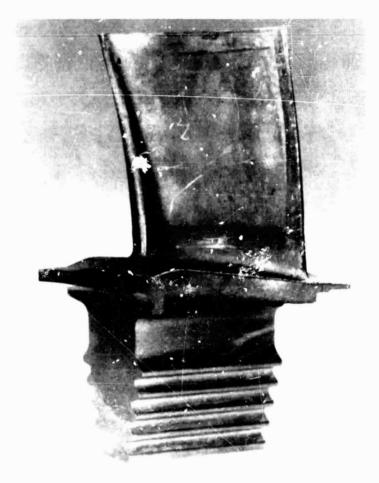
High-Pressure Turbine PWA 1480 Single Crystal Blade Casting With Machined Root Attachment, Platform and Airfoil Tip
